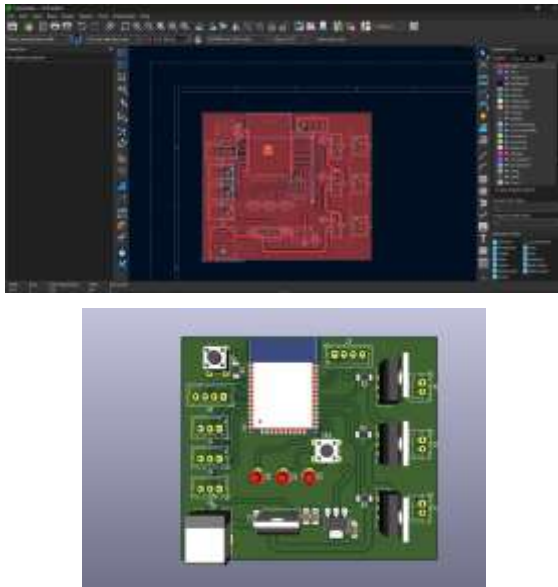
(a) PCB copper-layer routing in KiCad. (b) 3-D rendered view of the populated control board.
